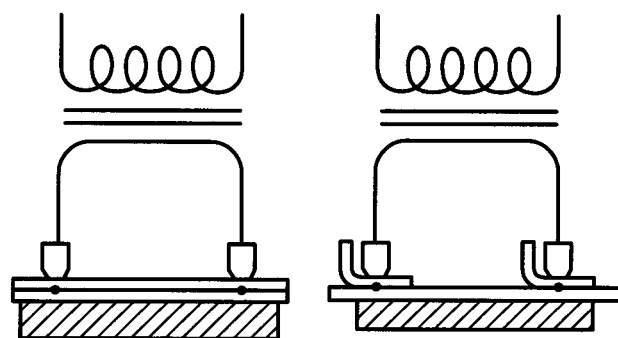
Typical Arrangements for Series Resistance Spot Welding
